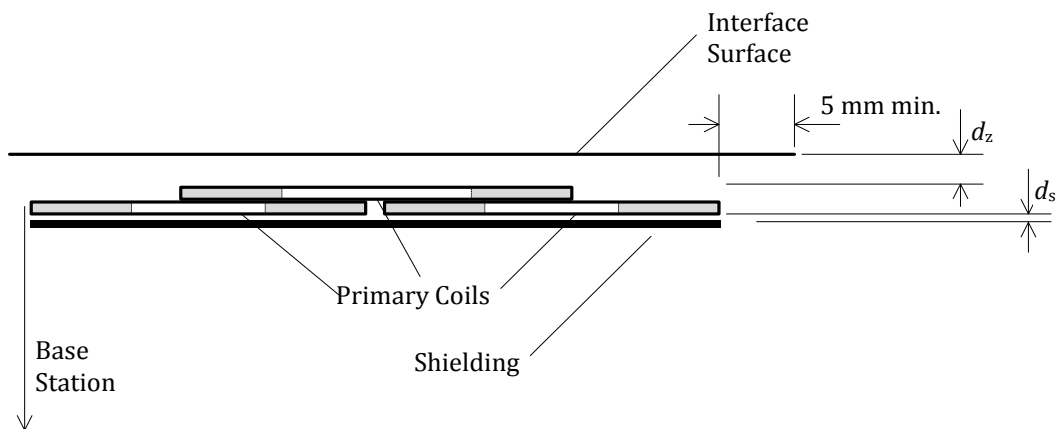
Primary Coil assembly of Power Transmitter design A6
